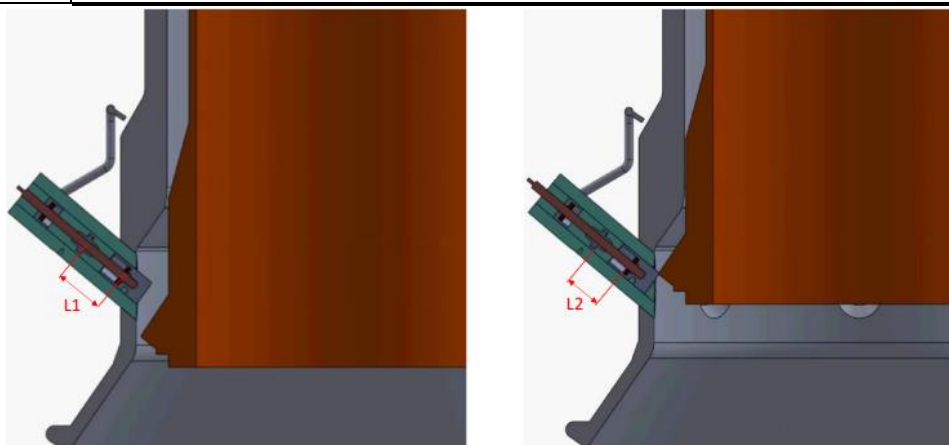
Latch Mechanism spring design conditions (L1 and L2)
